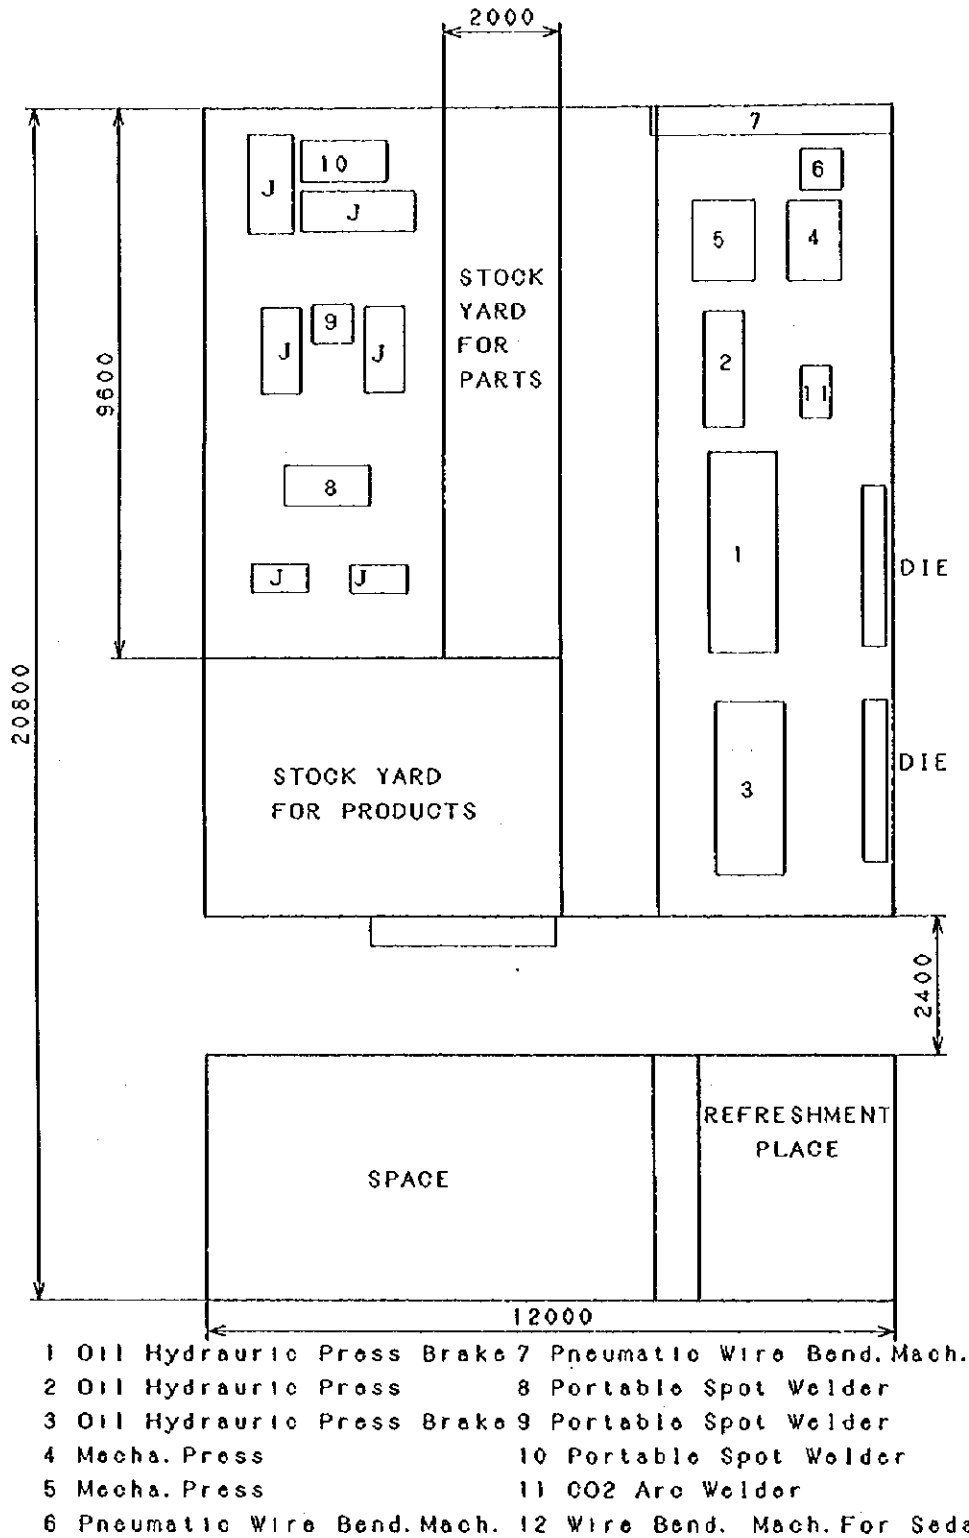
A Planned Layout for wire frame working of Rear-seat Cushion Work Process for Passenger Cars
